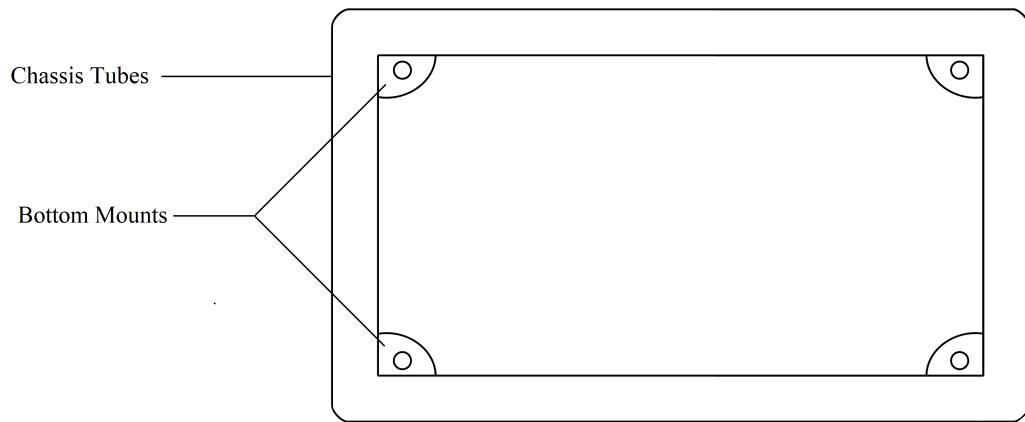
Top View of Bottom Mounts welded onto Chassis
